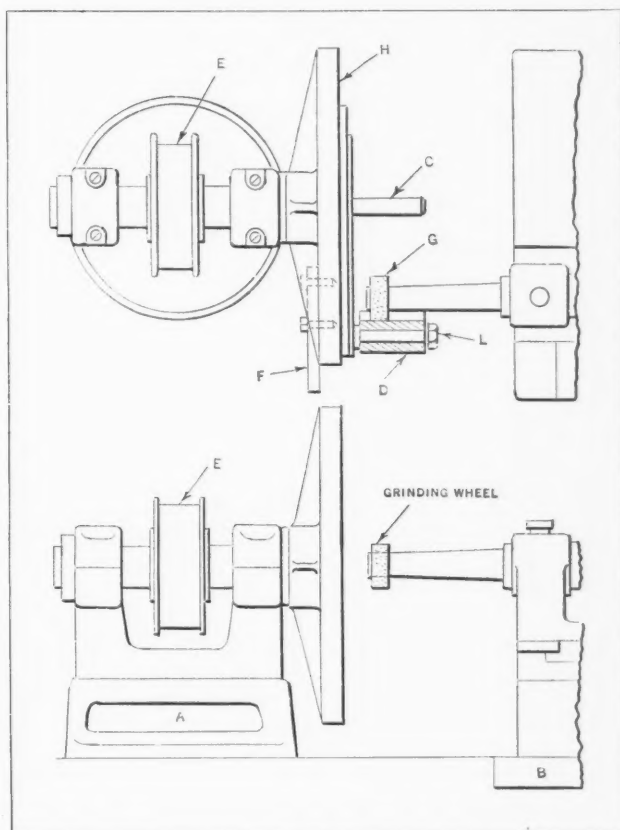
Set-up for Grinding Curved Surfaces of Pieces Shown at A and B, Fig. 1
